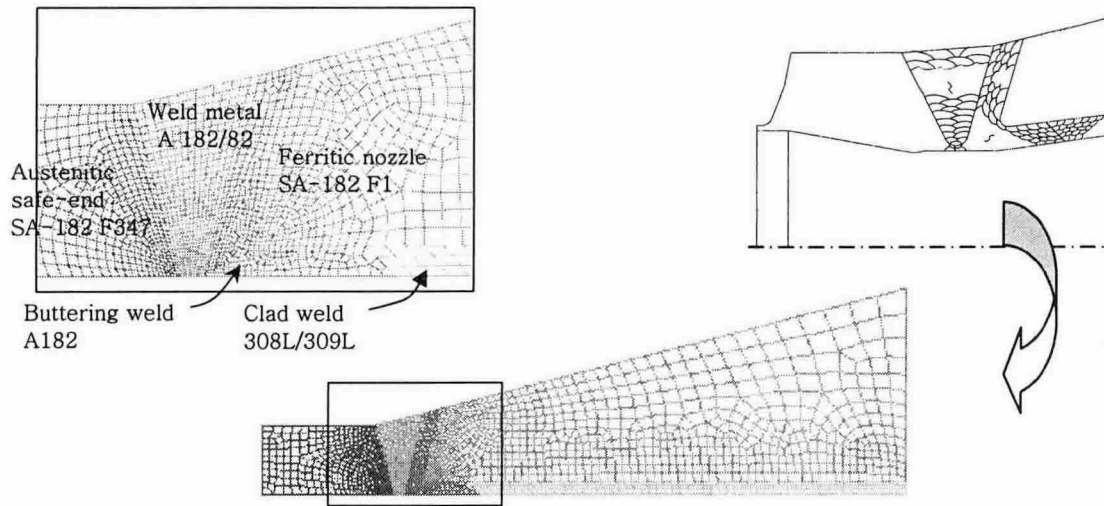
Physical model of dissimilar nozzle-to-safe end weld joint (top right), axisymmetric FE model (bottom) and details of weld zone (top left) used for weld mechanics analyses
